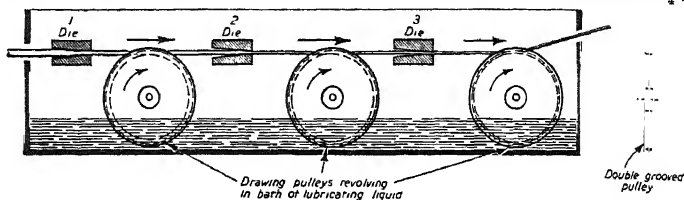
Diagrammatic view of a wire-drawing machine, showing manner in which wire is drawn through a series of dies of successively decreasing diameters.
